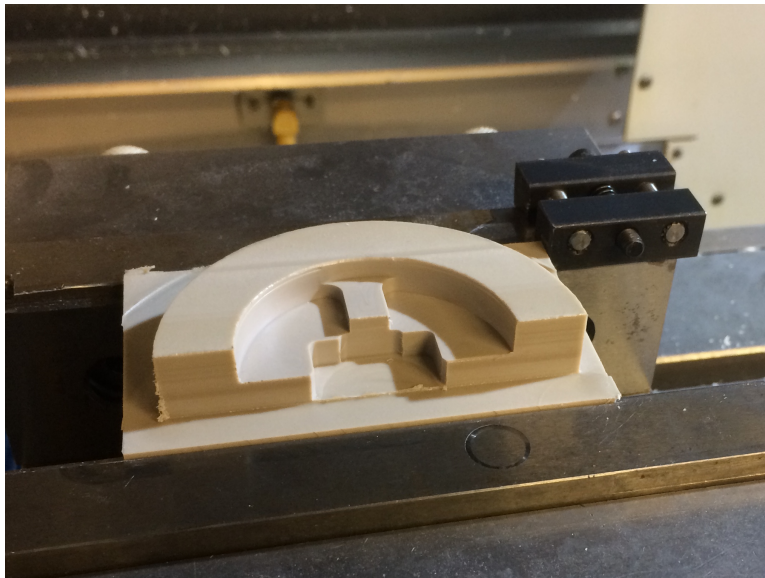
Linear Potentiometer Guide mid-manufacturing.
